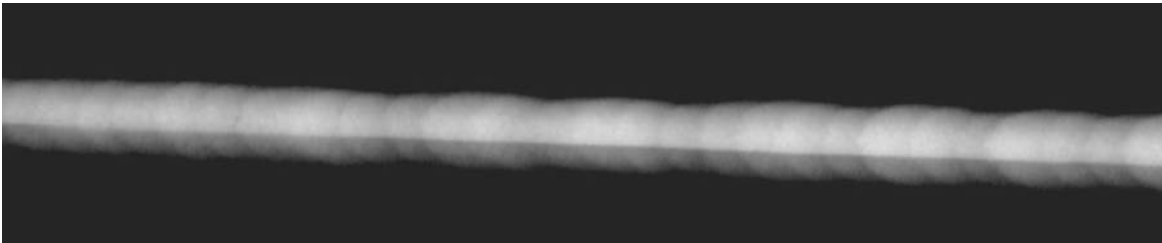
Radiographic image of JT-05. The mismatch indication can be seen as a light image with a darker image superimposed over the lower part of the weld. Weld direction is left to right.
